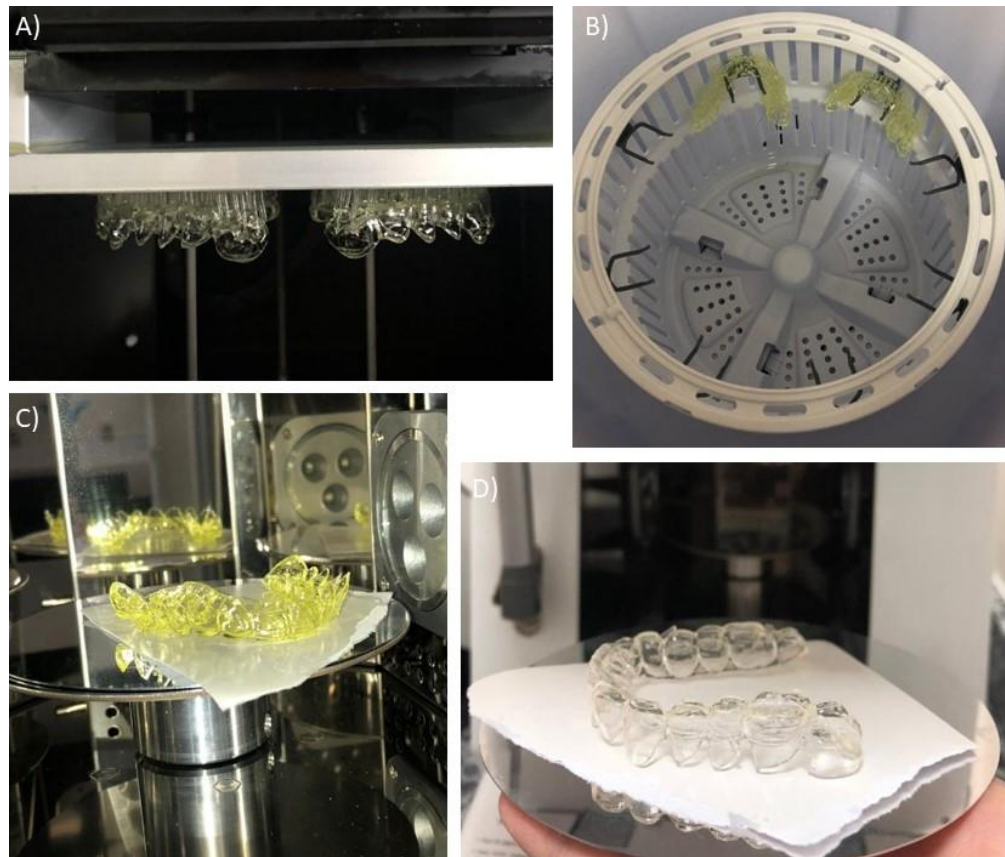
Post-processing of 3D printed aligners. A) Removal from the 3D printed, followed by supports removal. B) Centrifugation method for removal of residual resin. C) 3D printed aligner inside the UV curing chamber before post-curing. D) 3D printed aligner after post-curing in the UV chamber.
